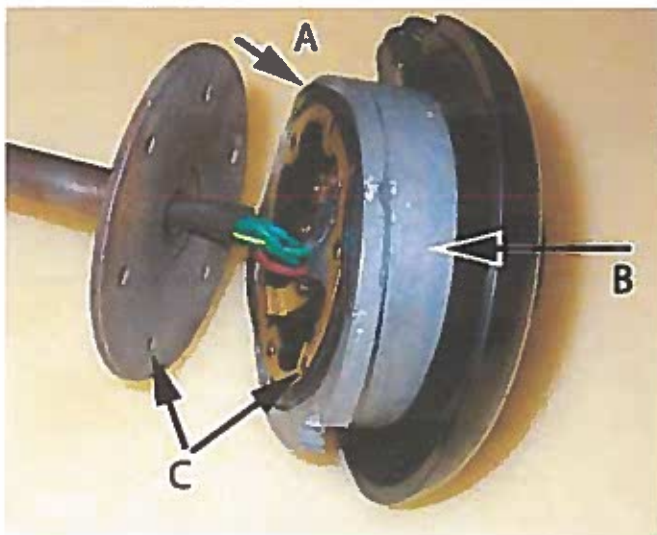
On cars with non-adjustable steering columns, a wavy spring washer (A) presses the cancelling ring (B) in position on the switch body. Three Bakelite pins engage mating holes in the plate and position the switch while the mounting screws are inserted.
